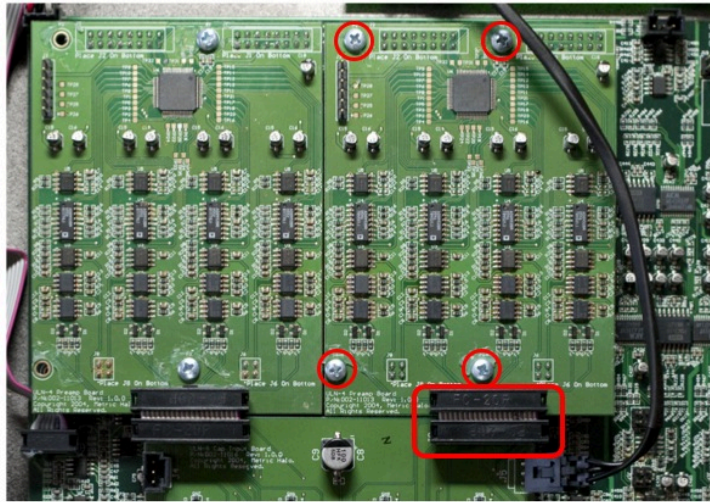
Installing the Ch. 5-8 Mic Pre Board
